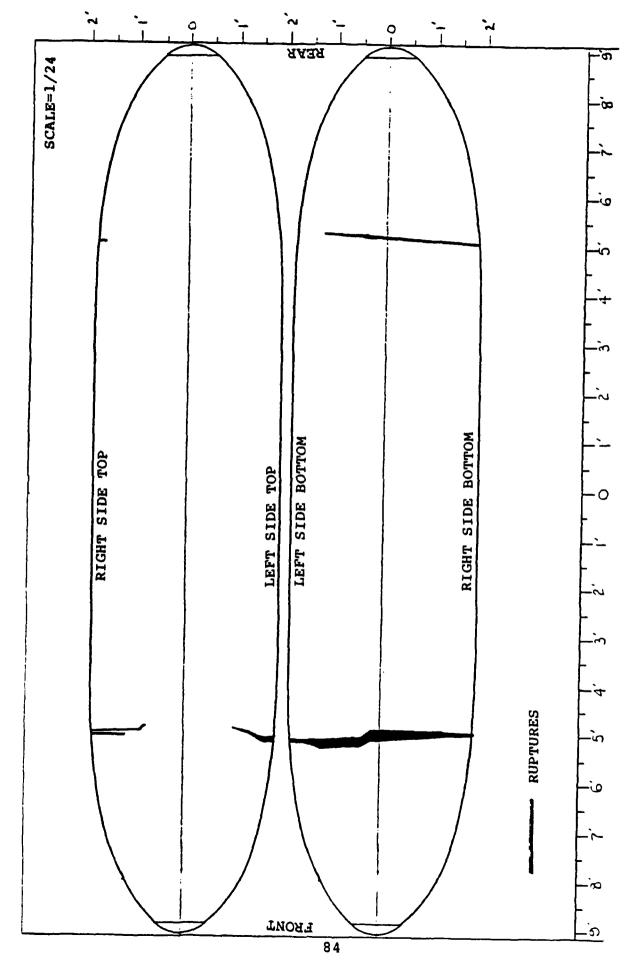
FUEL TANK SN0002 RUPTURE LOCATION SKETCH.
